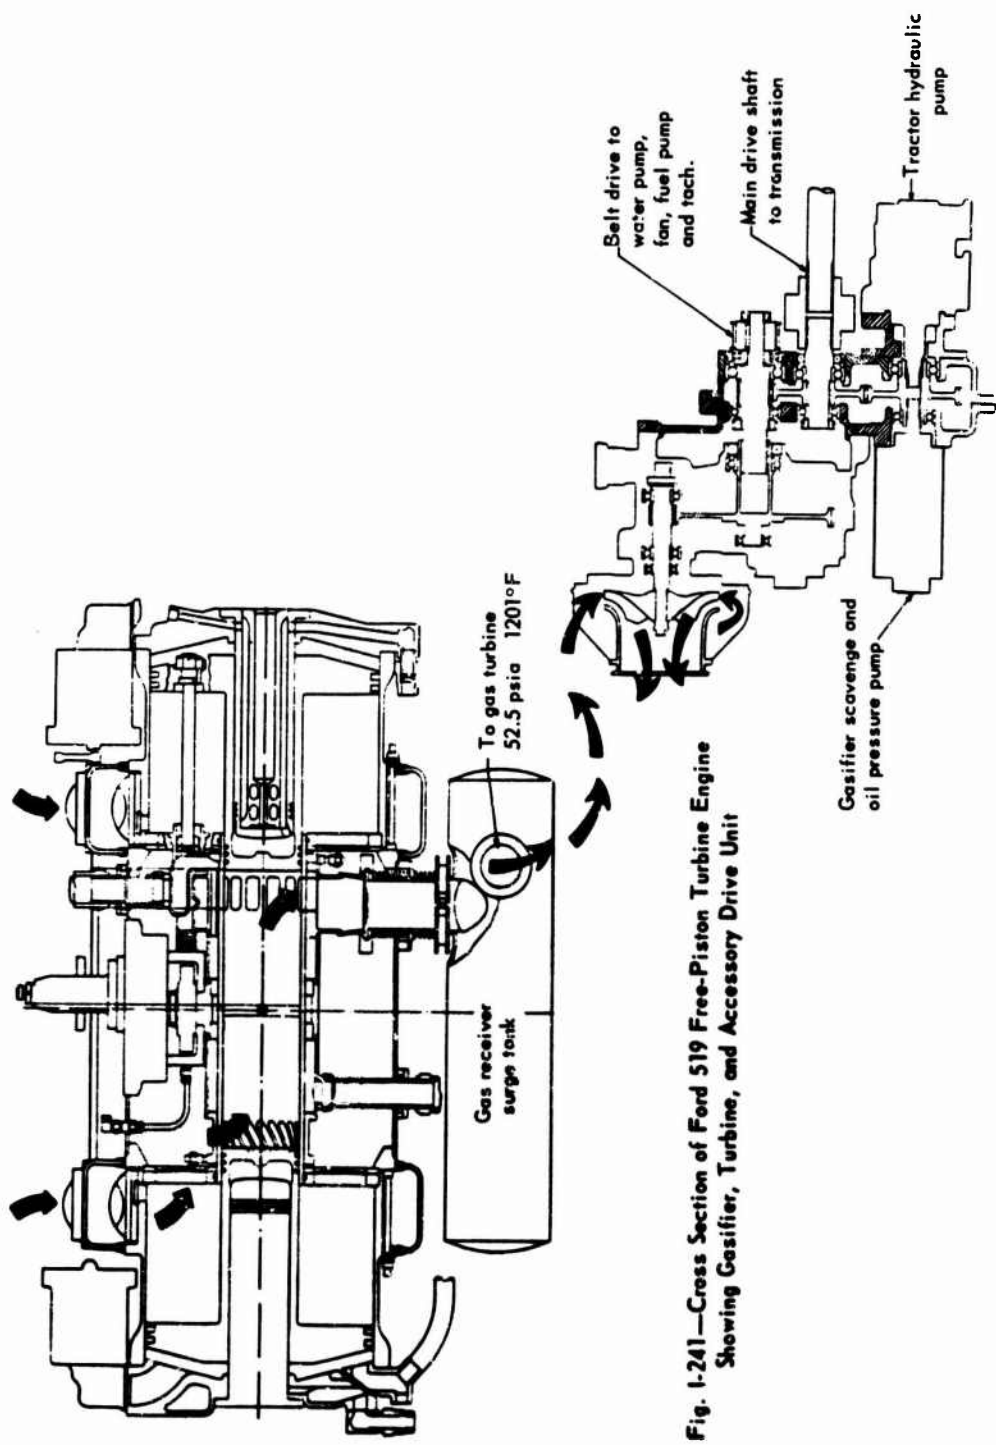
Cross Section of Ford 519 Free-Piston Turbine Engine Showing Gasifier, Turbine, and Accessory Drive Unit
